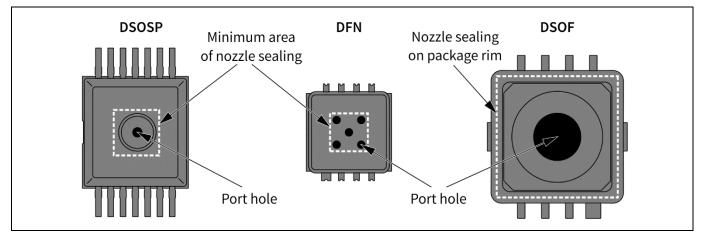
The vacuum nozzle of the pick-and-place tool should at minimum enclose the pressure ports of DSOSP and DFN packages (left). When picking the DSOF pressure sensor package the nozzle should seal with the package rim (right).
